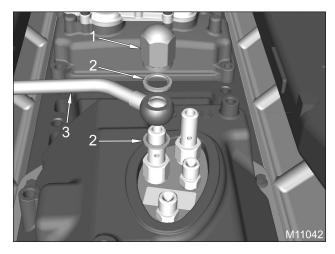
High-pressure pump to cooler tube assembly, M12 cap nut, and M12 bonded seal washers
